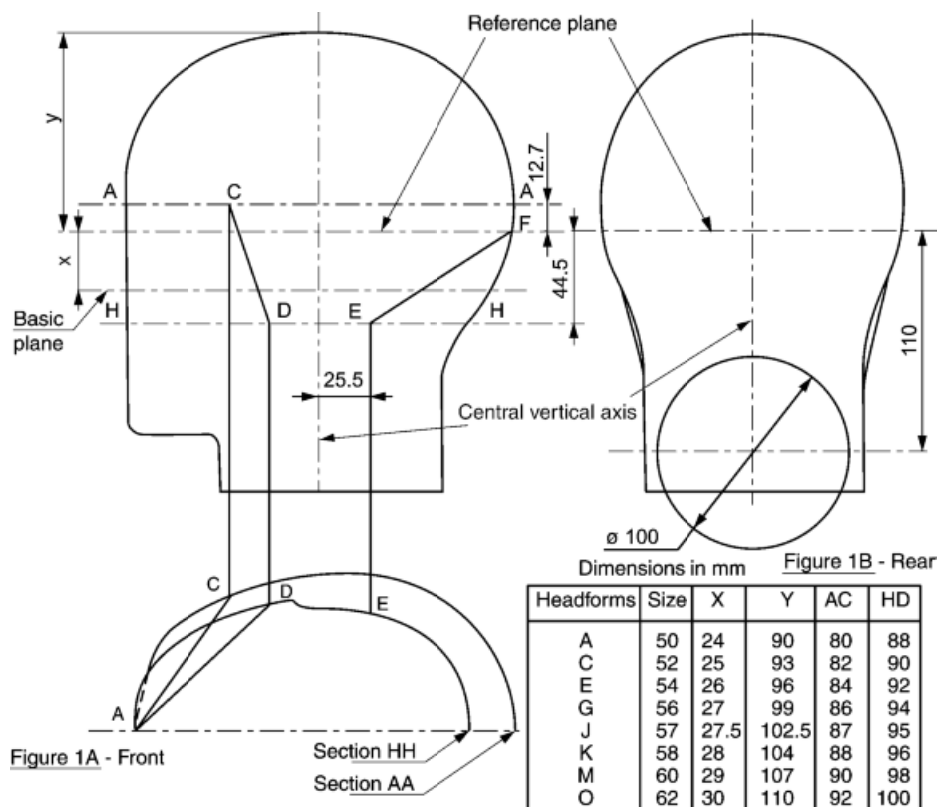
Geometry and dimensions of ECE 22.05 headform [ECE R22.05, 2002].
